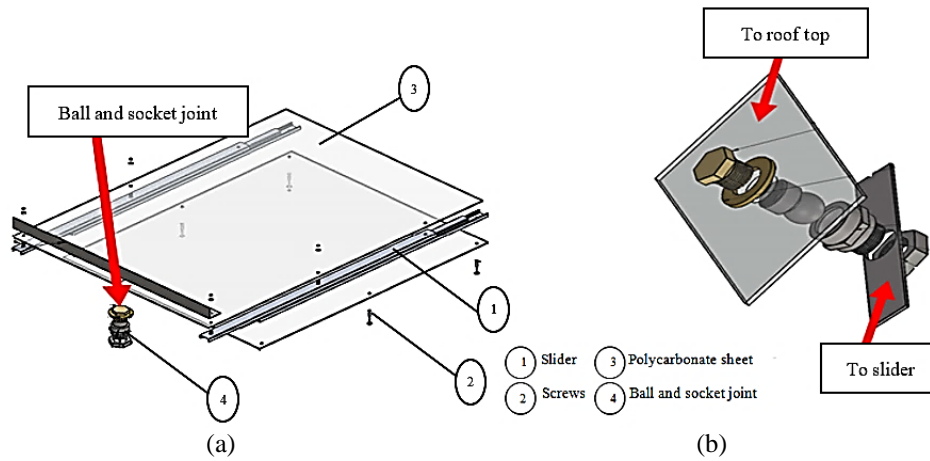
Detailed of roof top components: (a) sliding track and (b) ball joint
